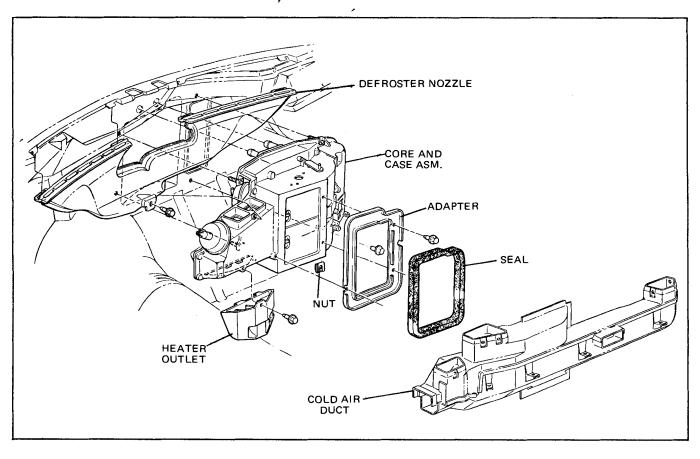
A-119 B Series A/C Heater Core and Case Installation
